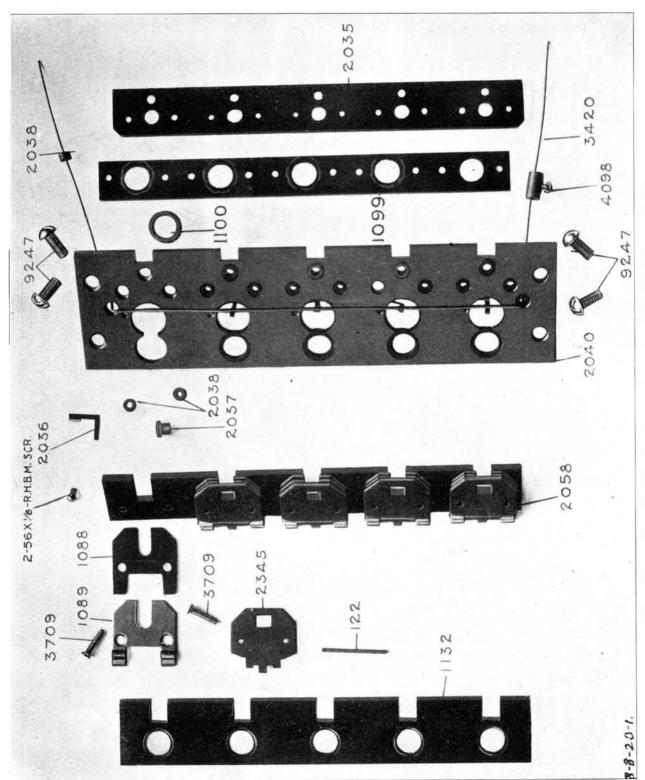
Type No. 114—Mounting Strip for No. 3 Combined Drop and Jack Piece No. 2038 refers to bushing only.
